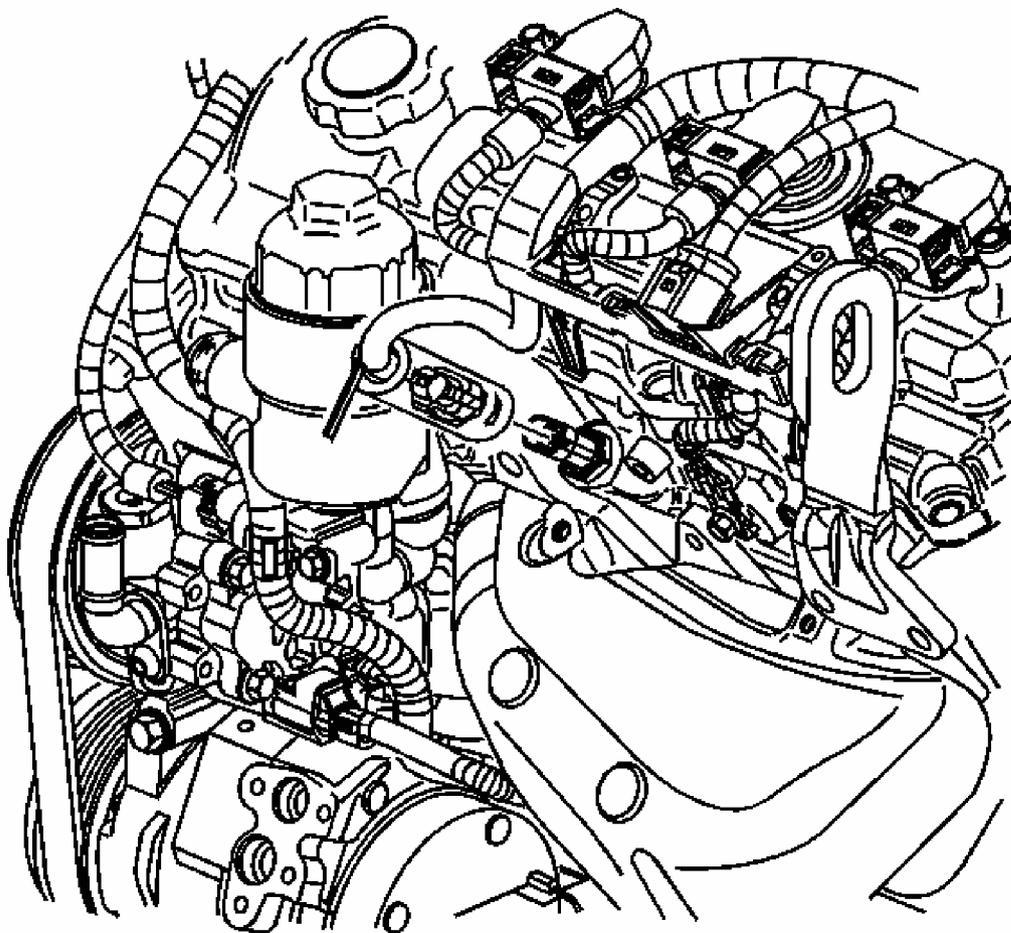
View Of Coolant Temperature Sensor And Electrical Connector
